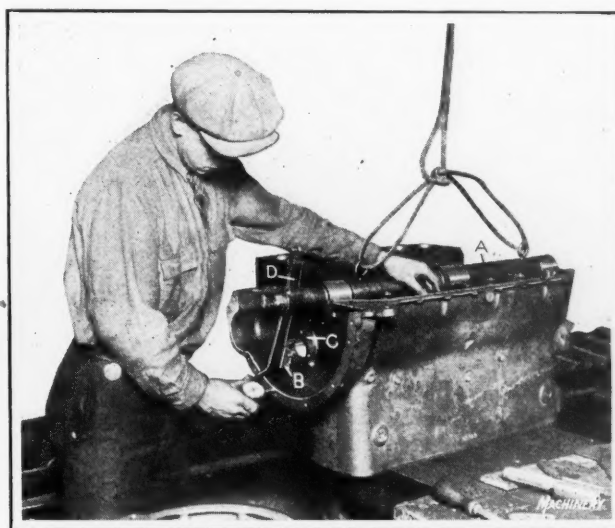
Gaging Device used in checking Important Dimensions of Cylinder Blocks
